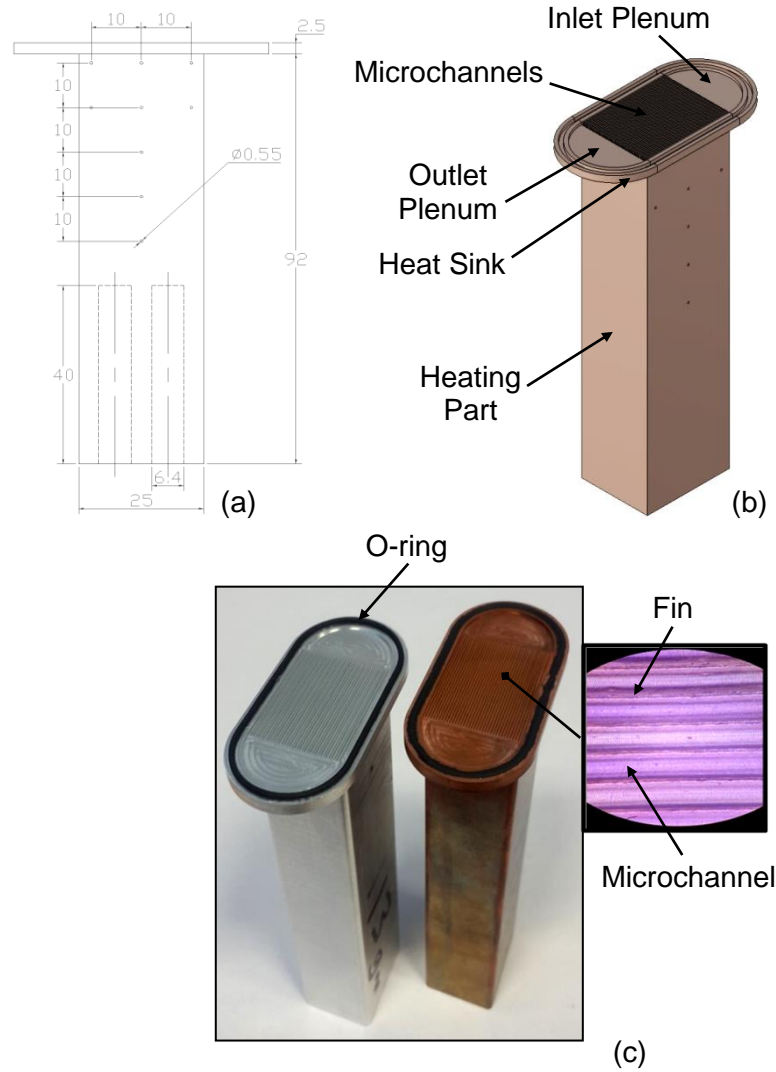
Heat sink block: (a) Dimensions in mm (b) Block parts
